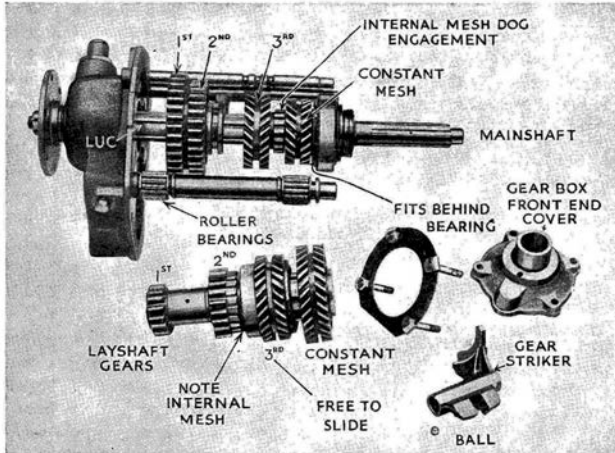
Illustration No. 38.—Another view of the gearbox components. The complete layshaft gears have been removed from the layshaft. Note the internal mesh engagement of the top gear on the mainshaft and the third gear on the layshaft.
